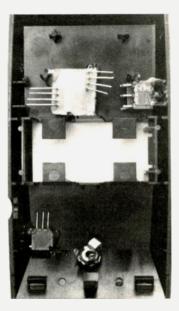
Photo C. The main fixtures — module, actuating switch, test jack, and count-rate pot—are stuck in the bottom of the TI-1025 case with hot-melt glue. This stuff is handy and can be cut off the stick and melted in place with your soldering iron. You don't need to buy the glue gun for the job.
